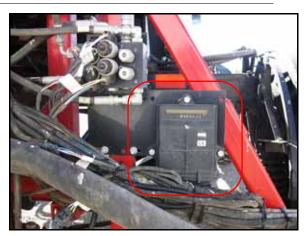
Valve Mounting Bracket Installed on the Machine
